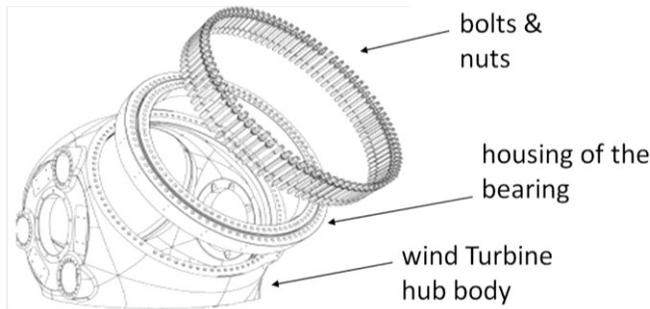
Overall assembly process (picture provided by Gamesa Corp.)
